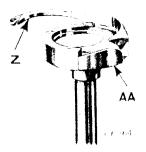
Sewing Hook Removed from Machine Showing Hook Washer
